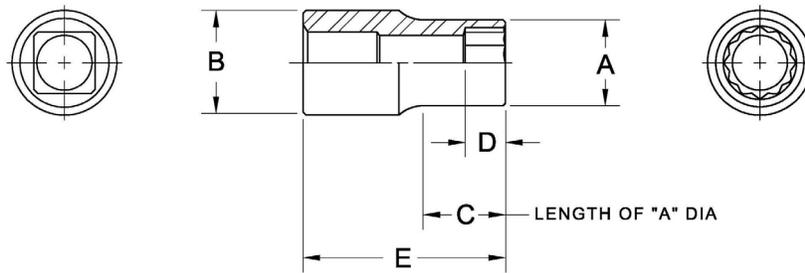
TYPE I, CLASS I SOCKET STYLE A & B
